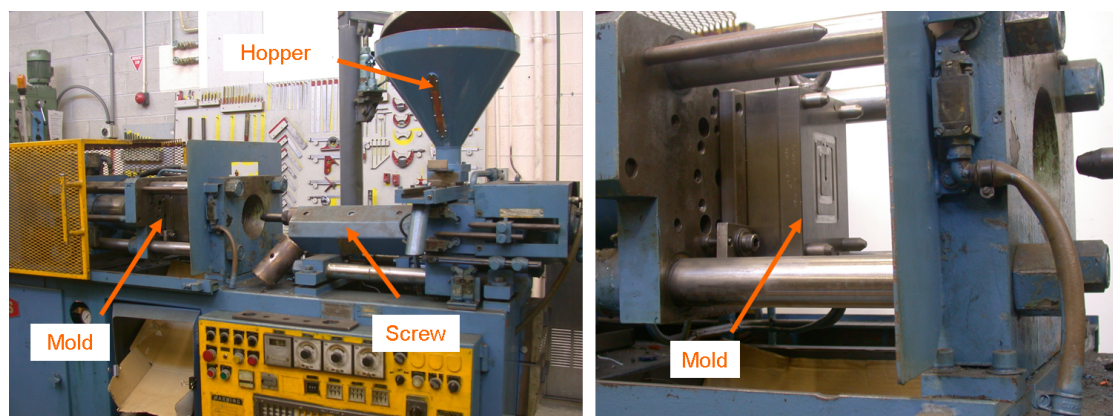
Small injection moulding machine used for injection moulding of paper clips.*<sup>1</sup>
